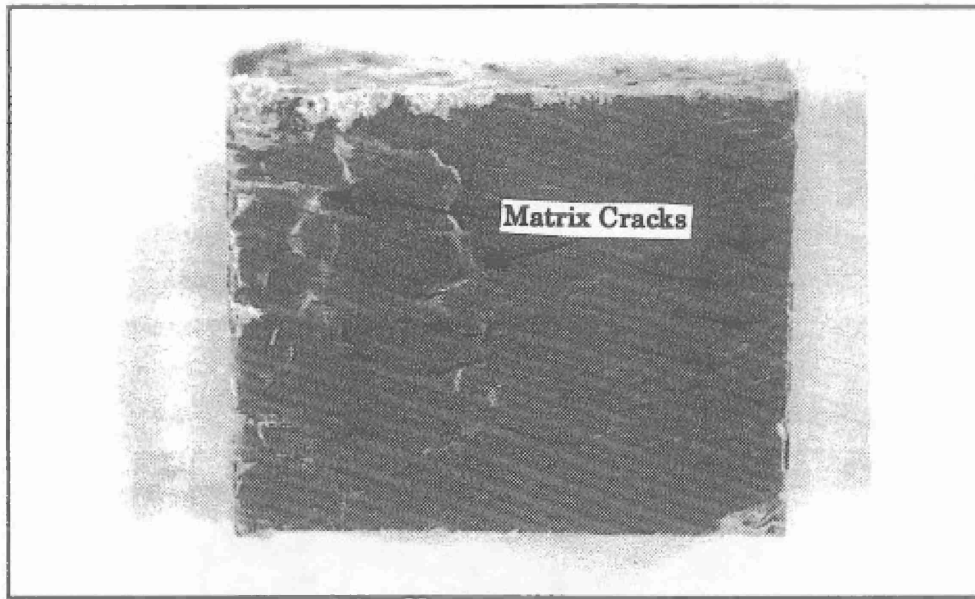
Side Views of Fracture Surface of the 3-D Braided Composite
